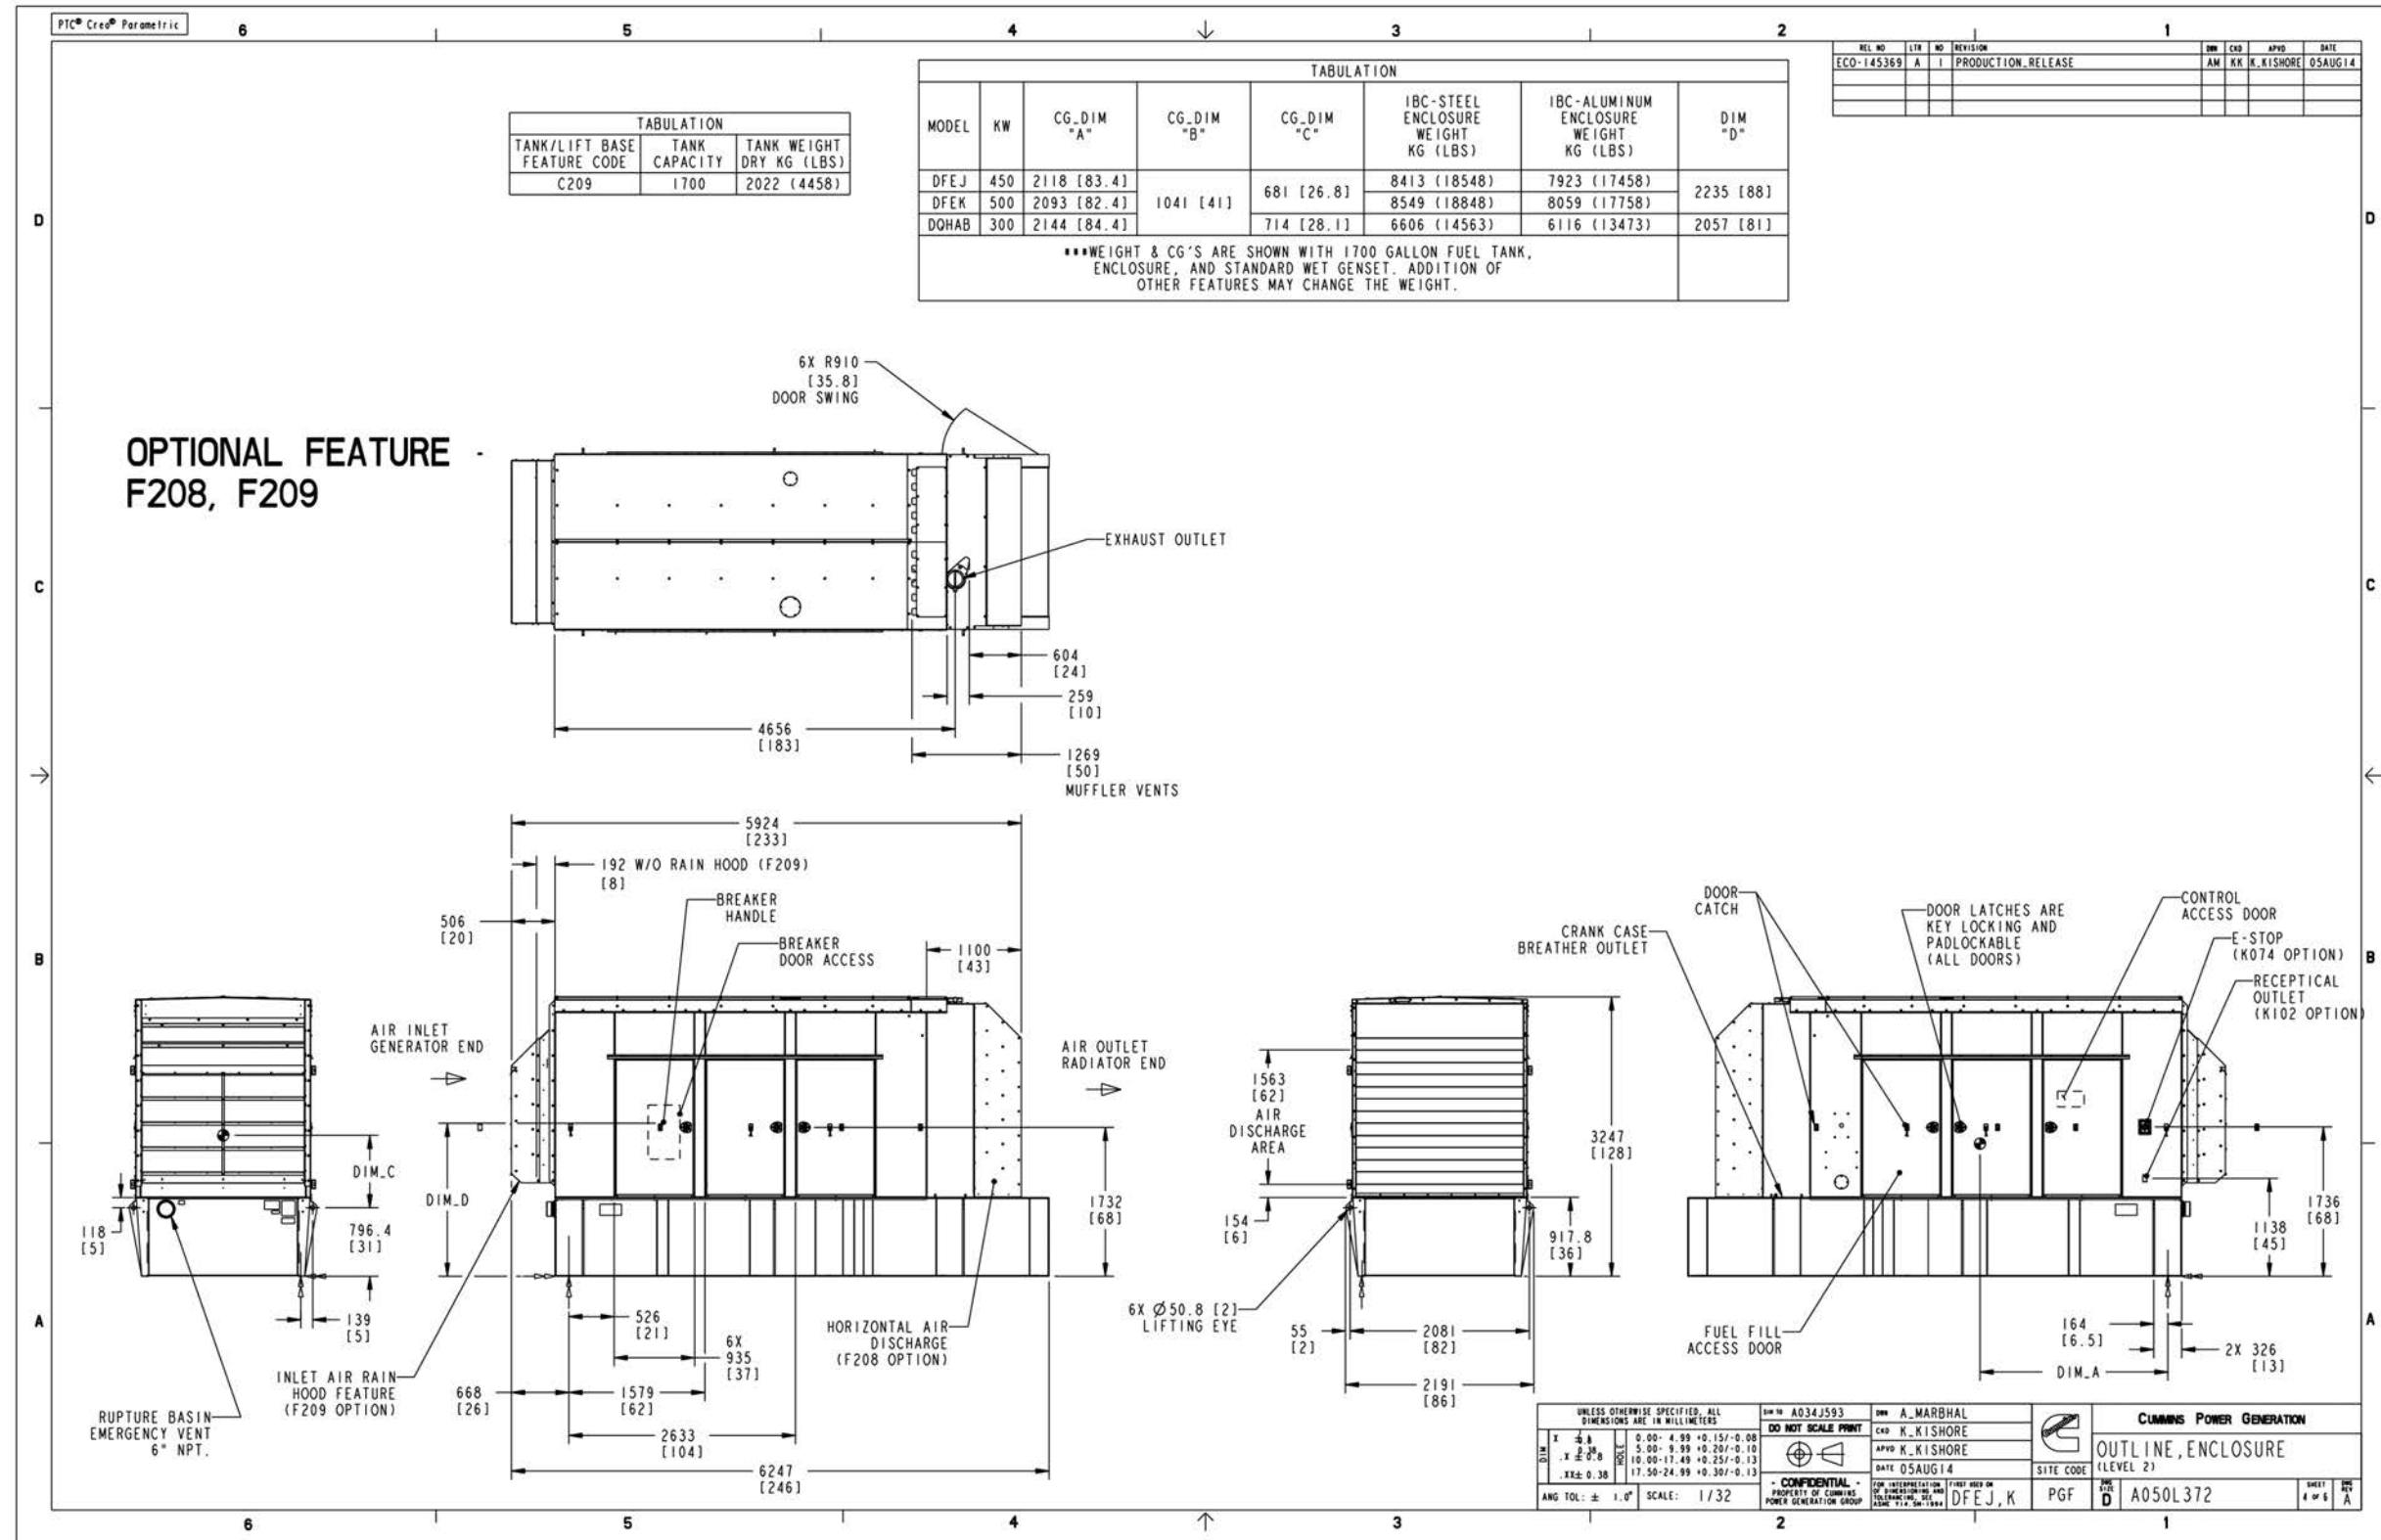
ENCLOSURE OUTLINE DRAWING (F202, F205, F206, F208, F209) (SHEET 4)
